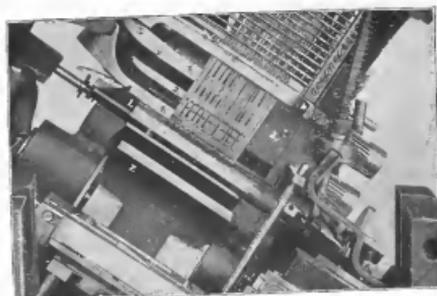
Typograph; assembly channel filled with line of two-letter matrices.
